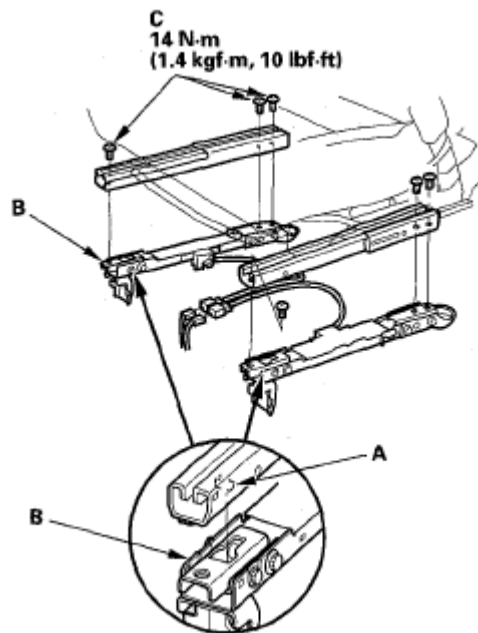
Identifying Front Passenger's Weight Sensors Tamper-Resistant Torx Bolts
